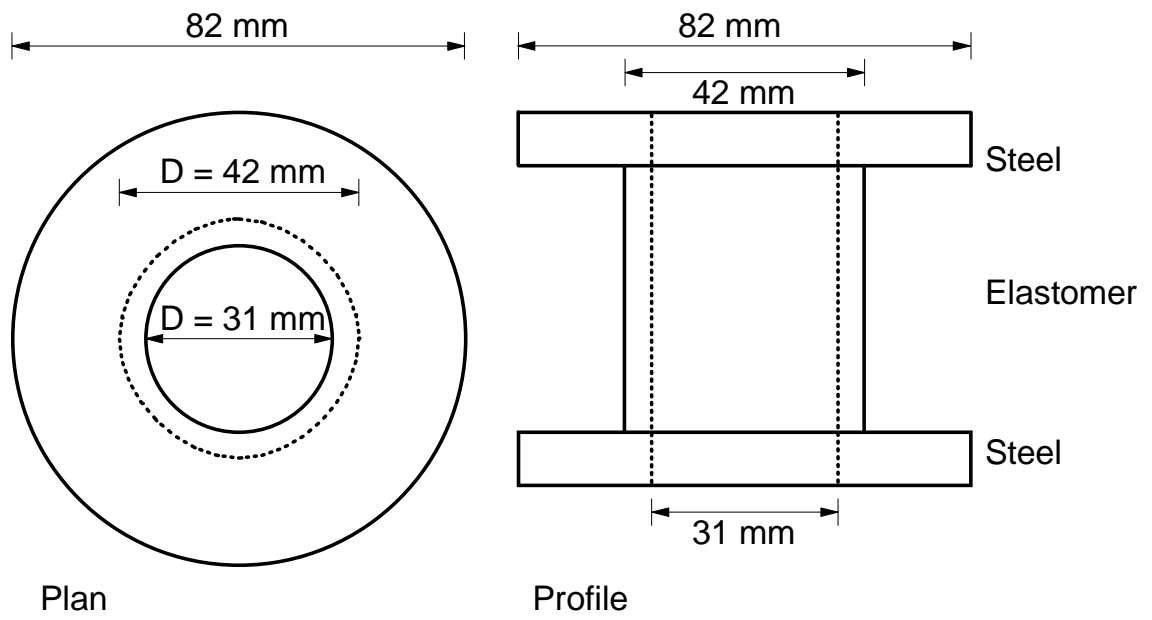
Typical ancillary shear cylinder specimen dimensions.
